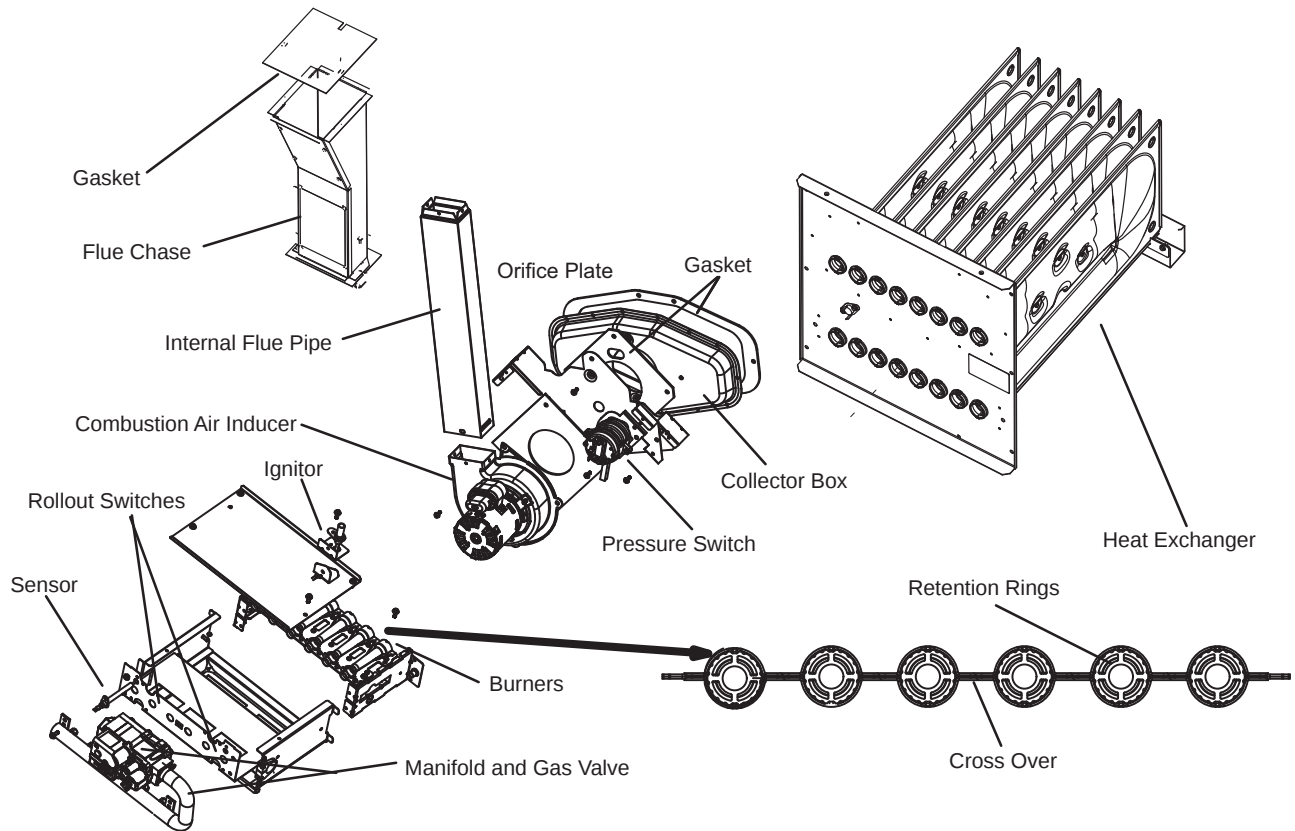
Burner, CAI Assembly & Heat Exchanger Removal
